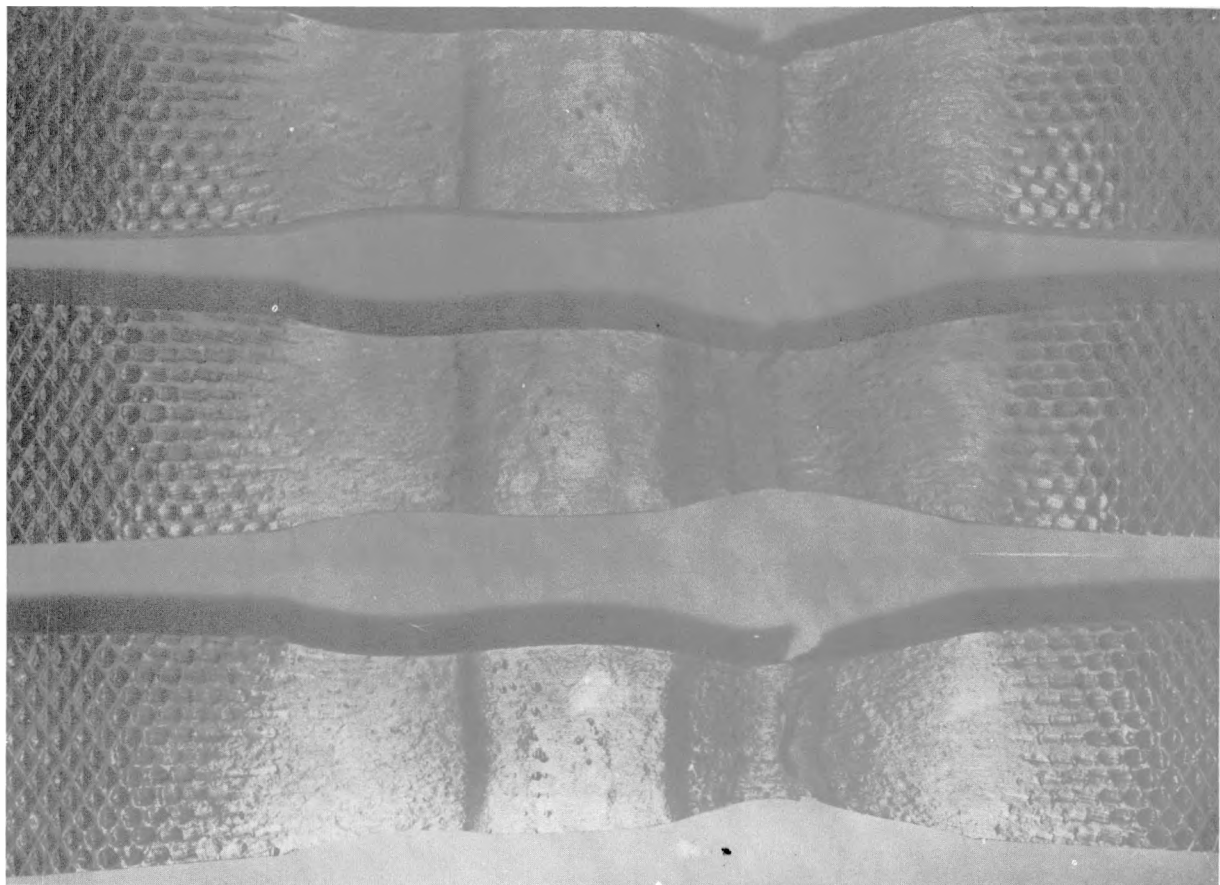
Transverse tensile specimens from pipe weld deposited with partially ferritic composition A electrodes.
